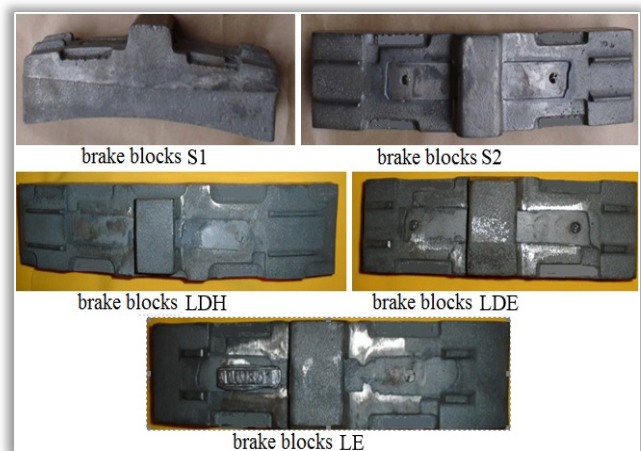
Types of brake blocks for engines and freight/ passenger wagons [8]
